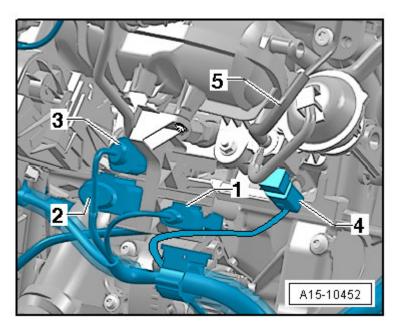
Identifying Vacuum Line And Electrical Connectors
